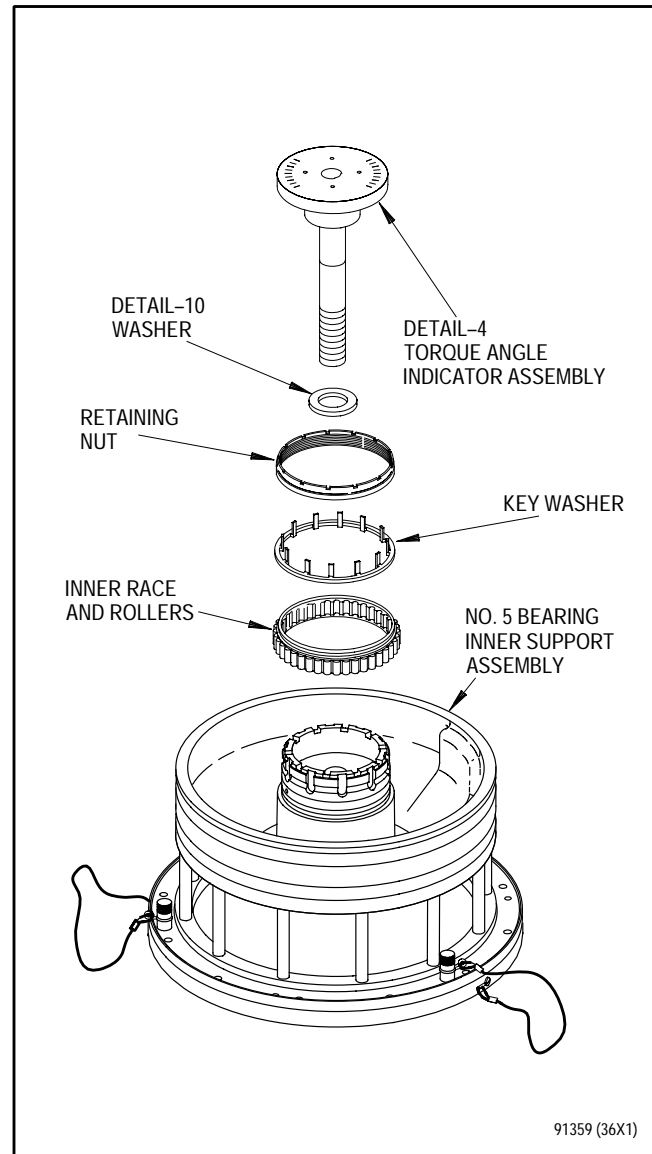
No. 5 Bearing Inner Support Assembly and No. 5 Bearing Inner Race and Rollers - Assembly (Sheet 2 of 6)
